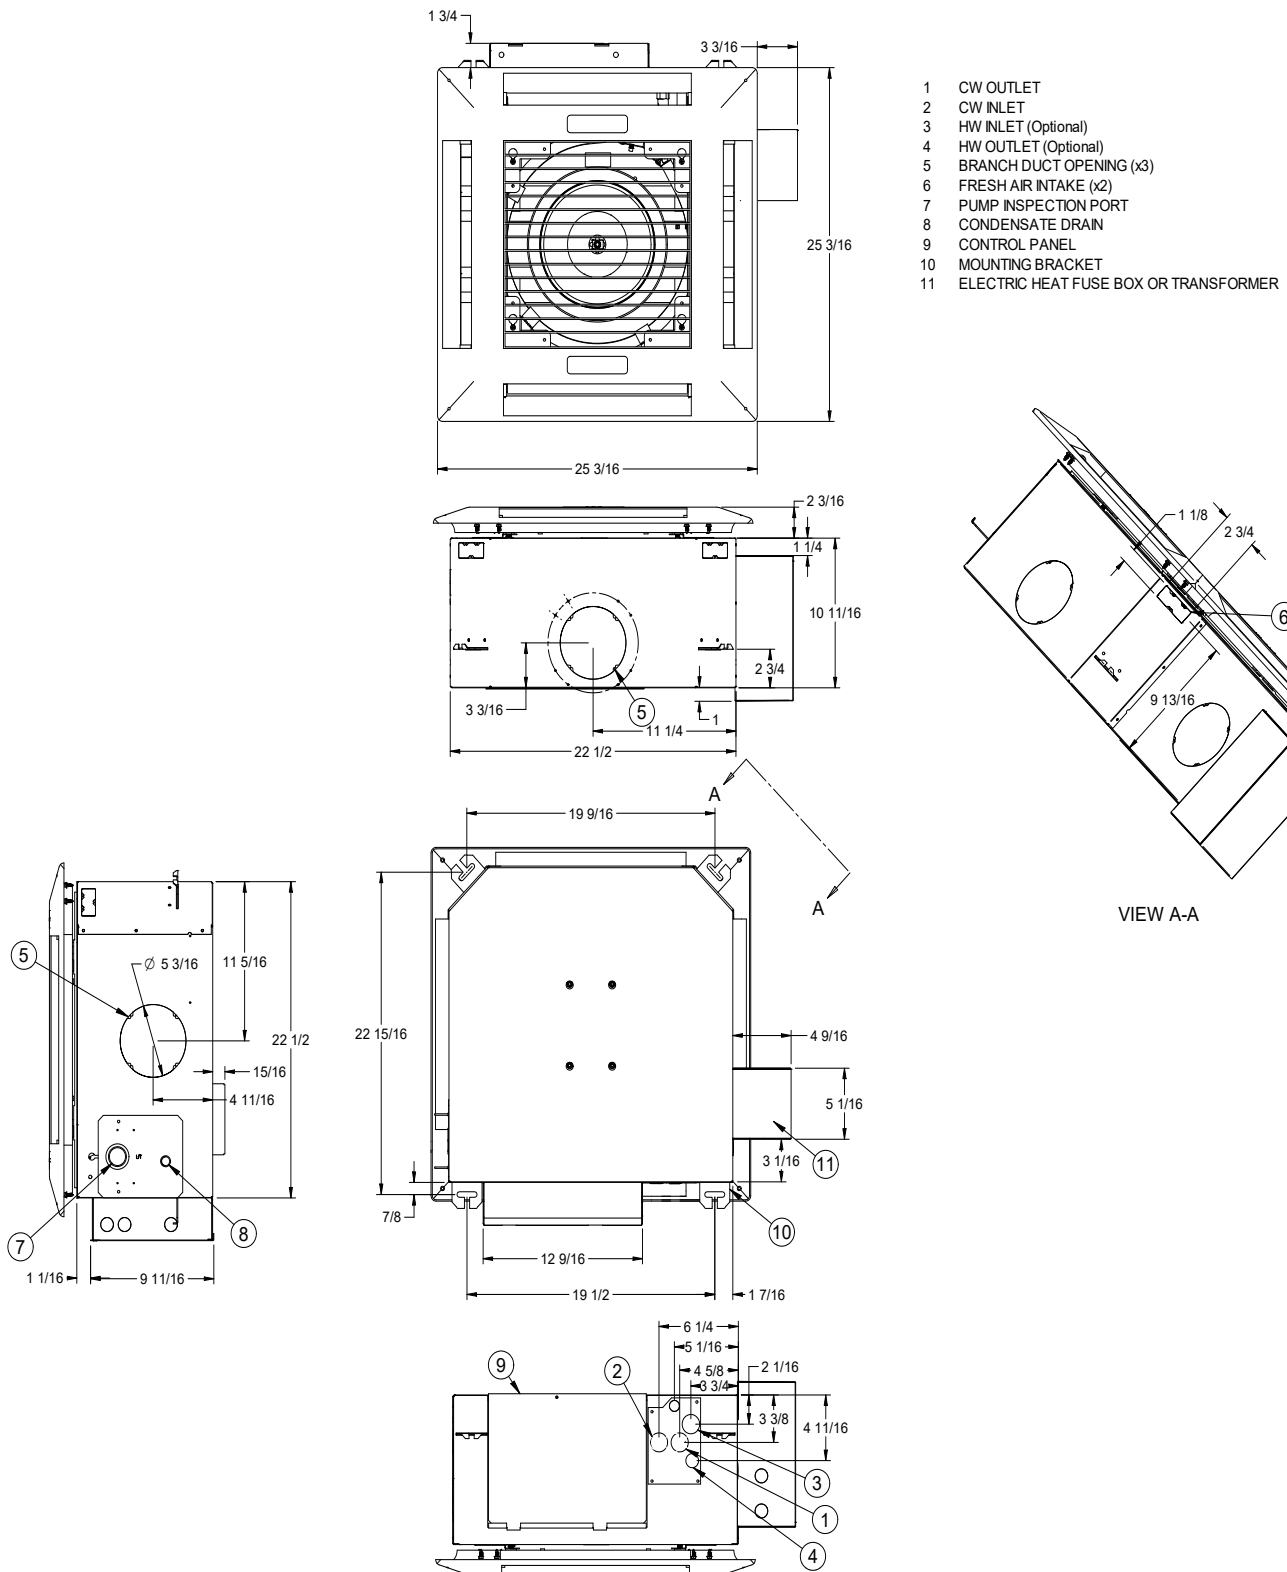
Dimensions - Medium Chassis: SCW18 and SCW20 (in inches)
